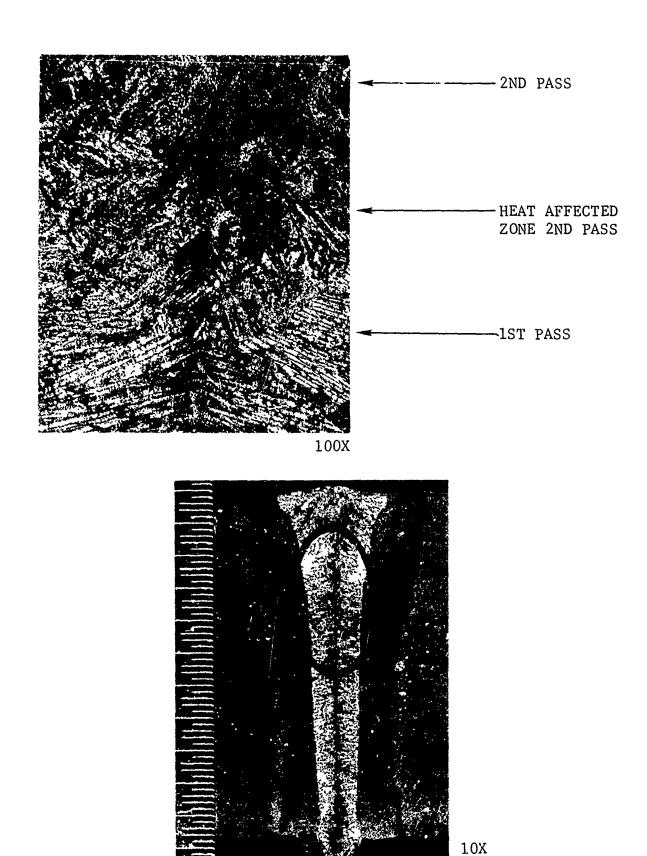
MACRO AND MICRO STRUCTURE OF EB WELDED .500 INCH THICK 10 Ni STEEL (WELD NO. H11)
